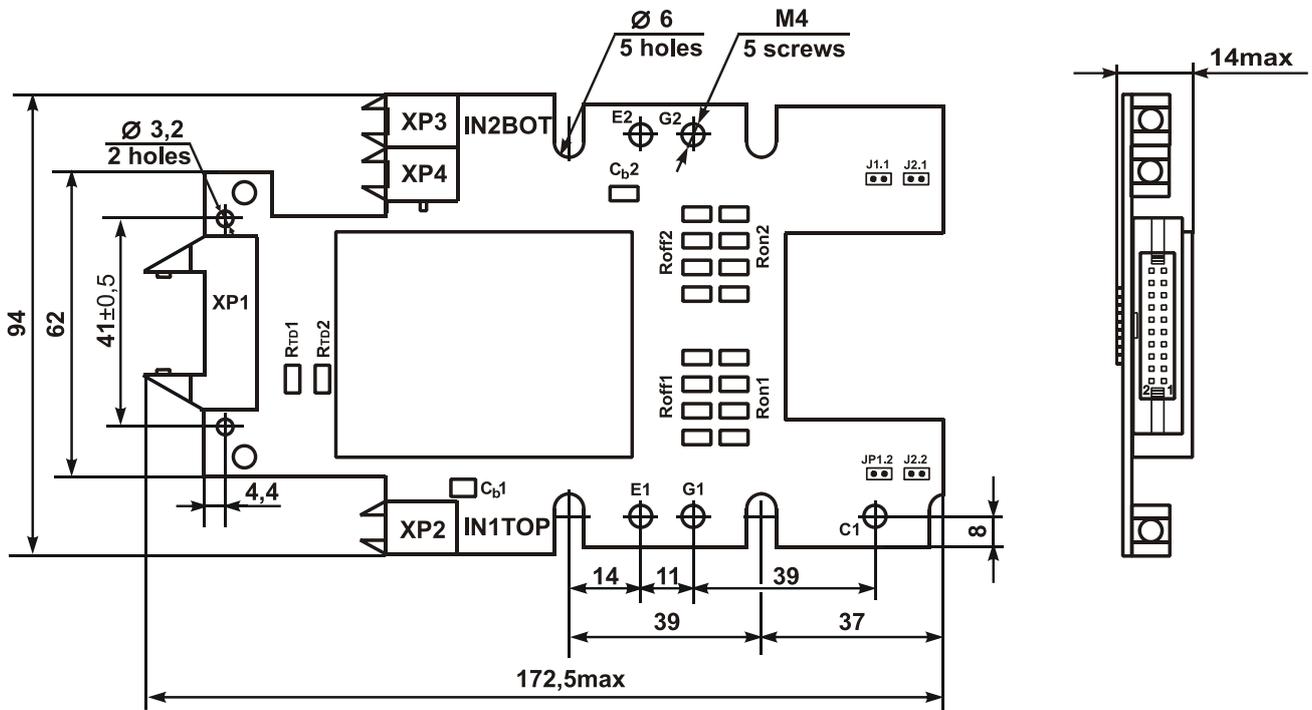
Overall drawing of driver DR2180P-BF1-1
